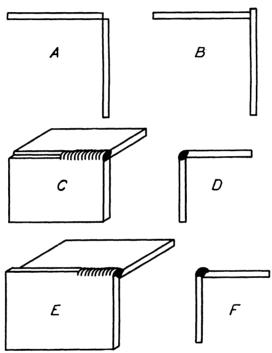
Outside corner welding: A & B. End views of two different seams, C. Showing A partly welded, note the position of the puddle and the filler rod, D. End view of A after welding, E. Showing B partly welded, F. End view of B after welding
